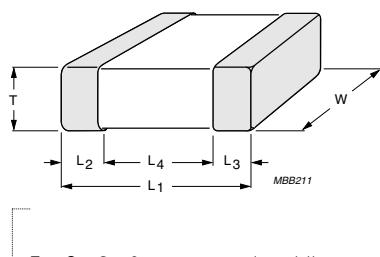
Surface mounted multilayer ceramic capacitor dimension
